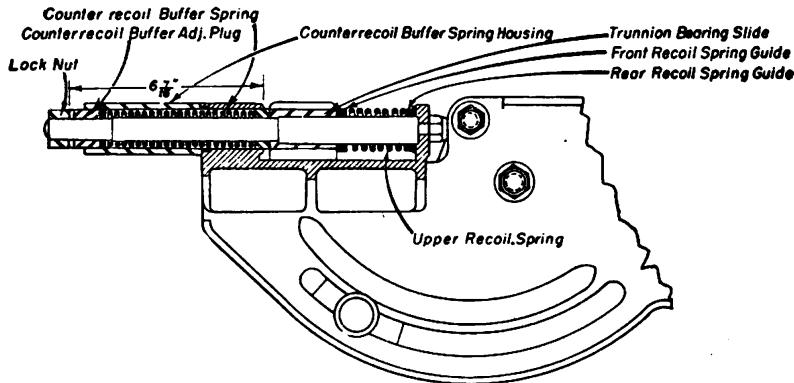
Upper recoil and counterrecoil mechanism.
